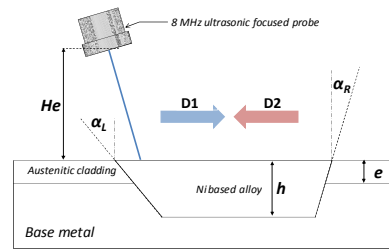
Generic geometry of the weld repair inspected area.
